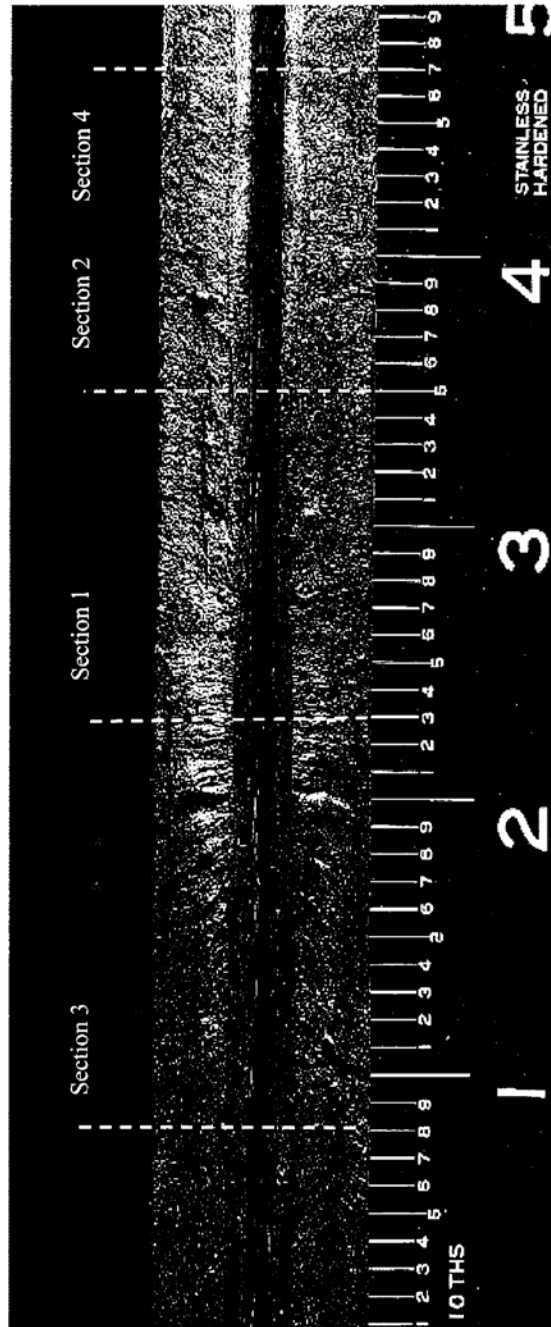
Fracture Surface Showing Markings Indicating the Origin to be a Small Hook Crack
